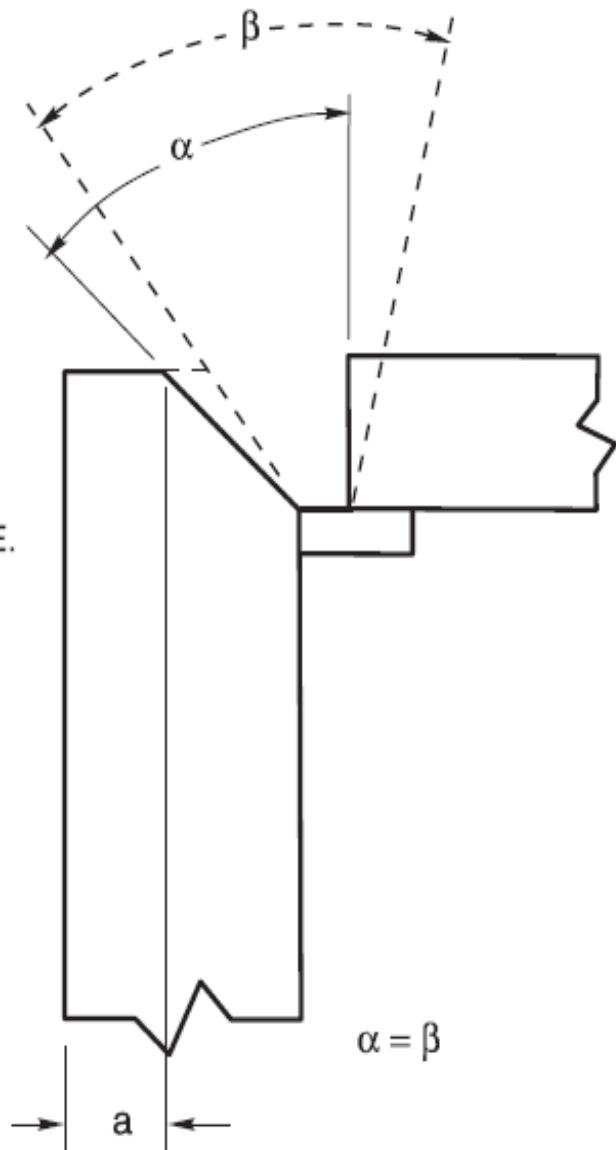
Details of Alternative Groove Preparations for Prequalified Corner Joints
